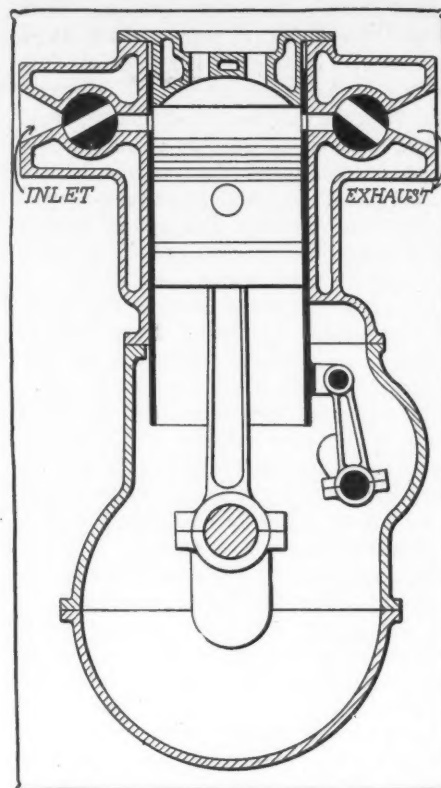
COMBINED ROTARY AND SLEEVE VALVES
